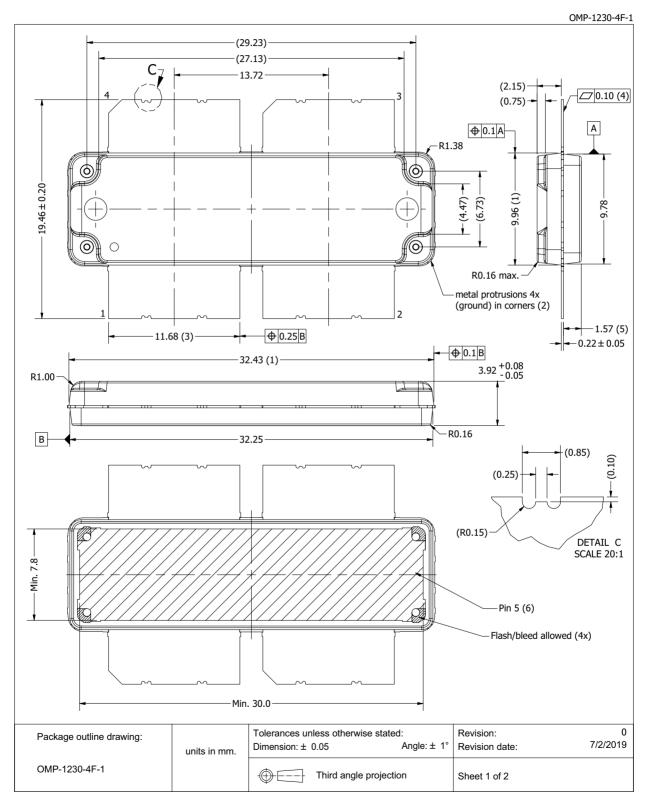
Package outline OMP-1230-4F-1 (sheet 1 of 2)
